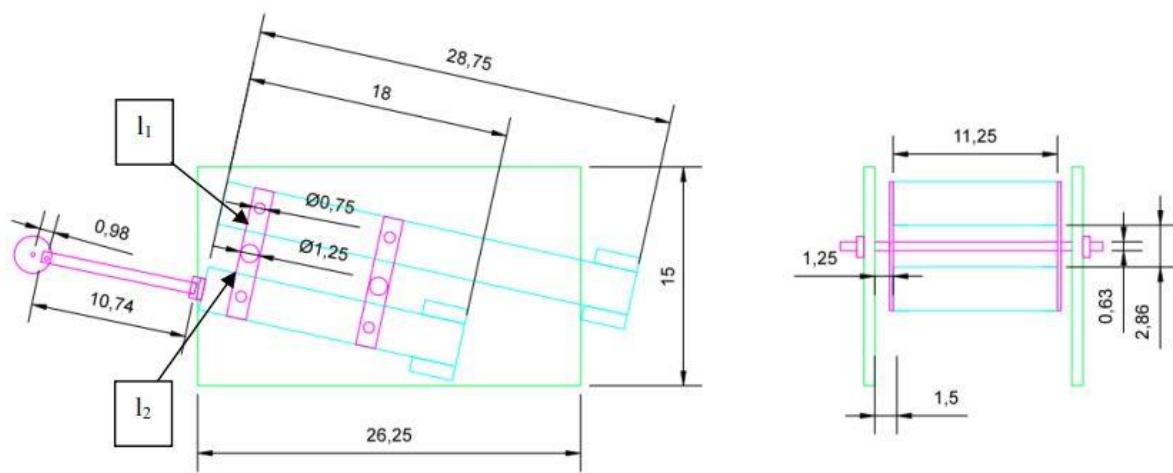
Side elevation view of sieve system (left); front elevation view of sieve system (right)
